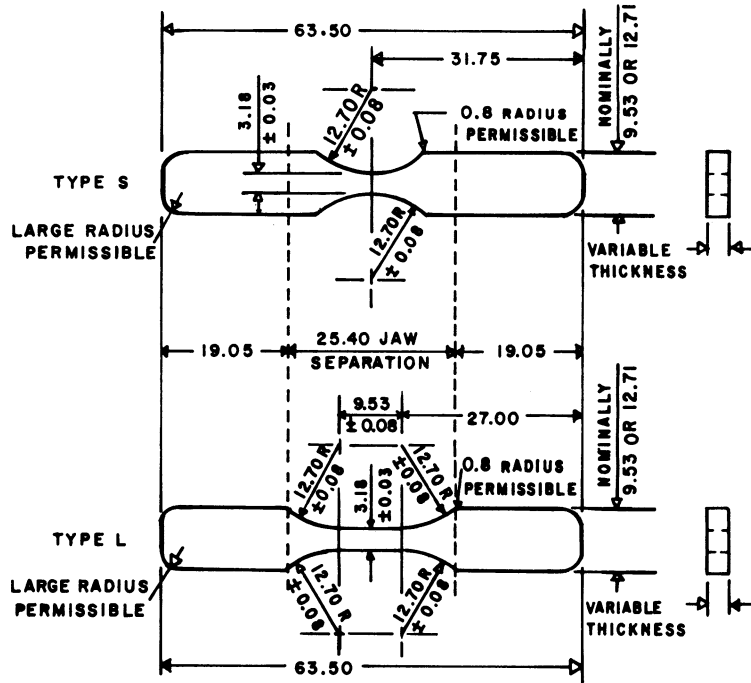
A Mold Dimensions of Types S and L Tension-Impact Specimens (Dimensioned in Millimetres)
